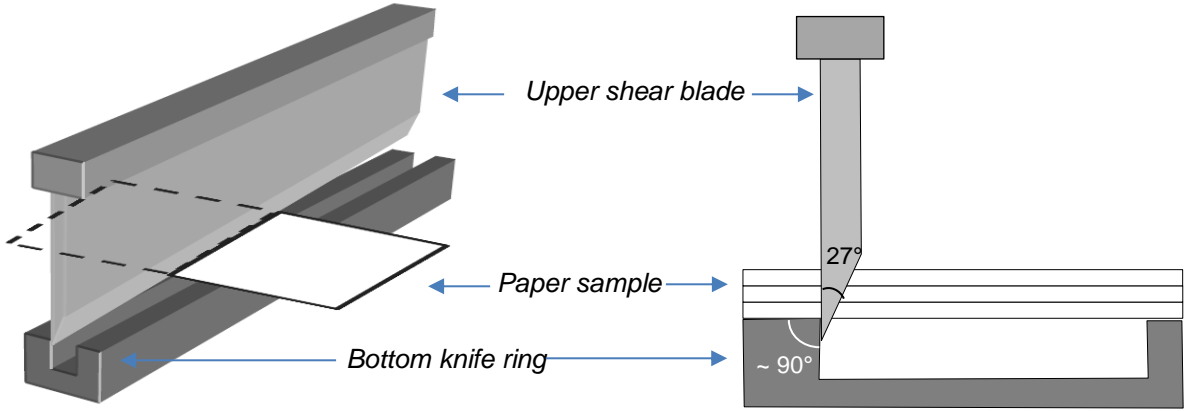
Perspective and front representations of the main parts of the laboratory cutting device: upper shear blade, bottom knife ring and paper sample at the beginning of the cutting action
